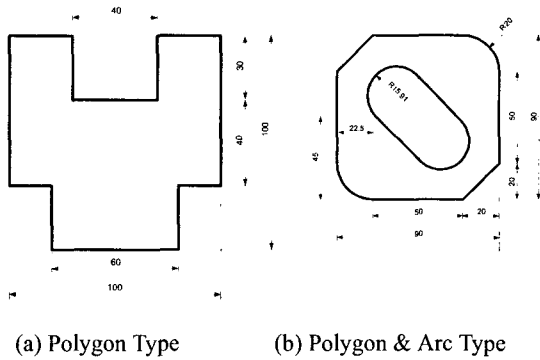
Geometry of workpiece drawn by DXF file format from Autocad
